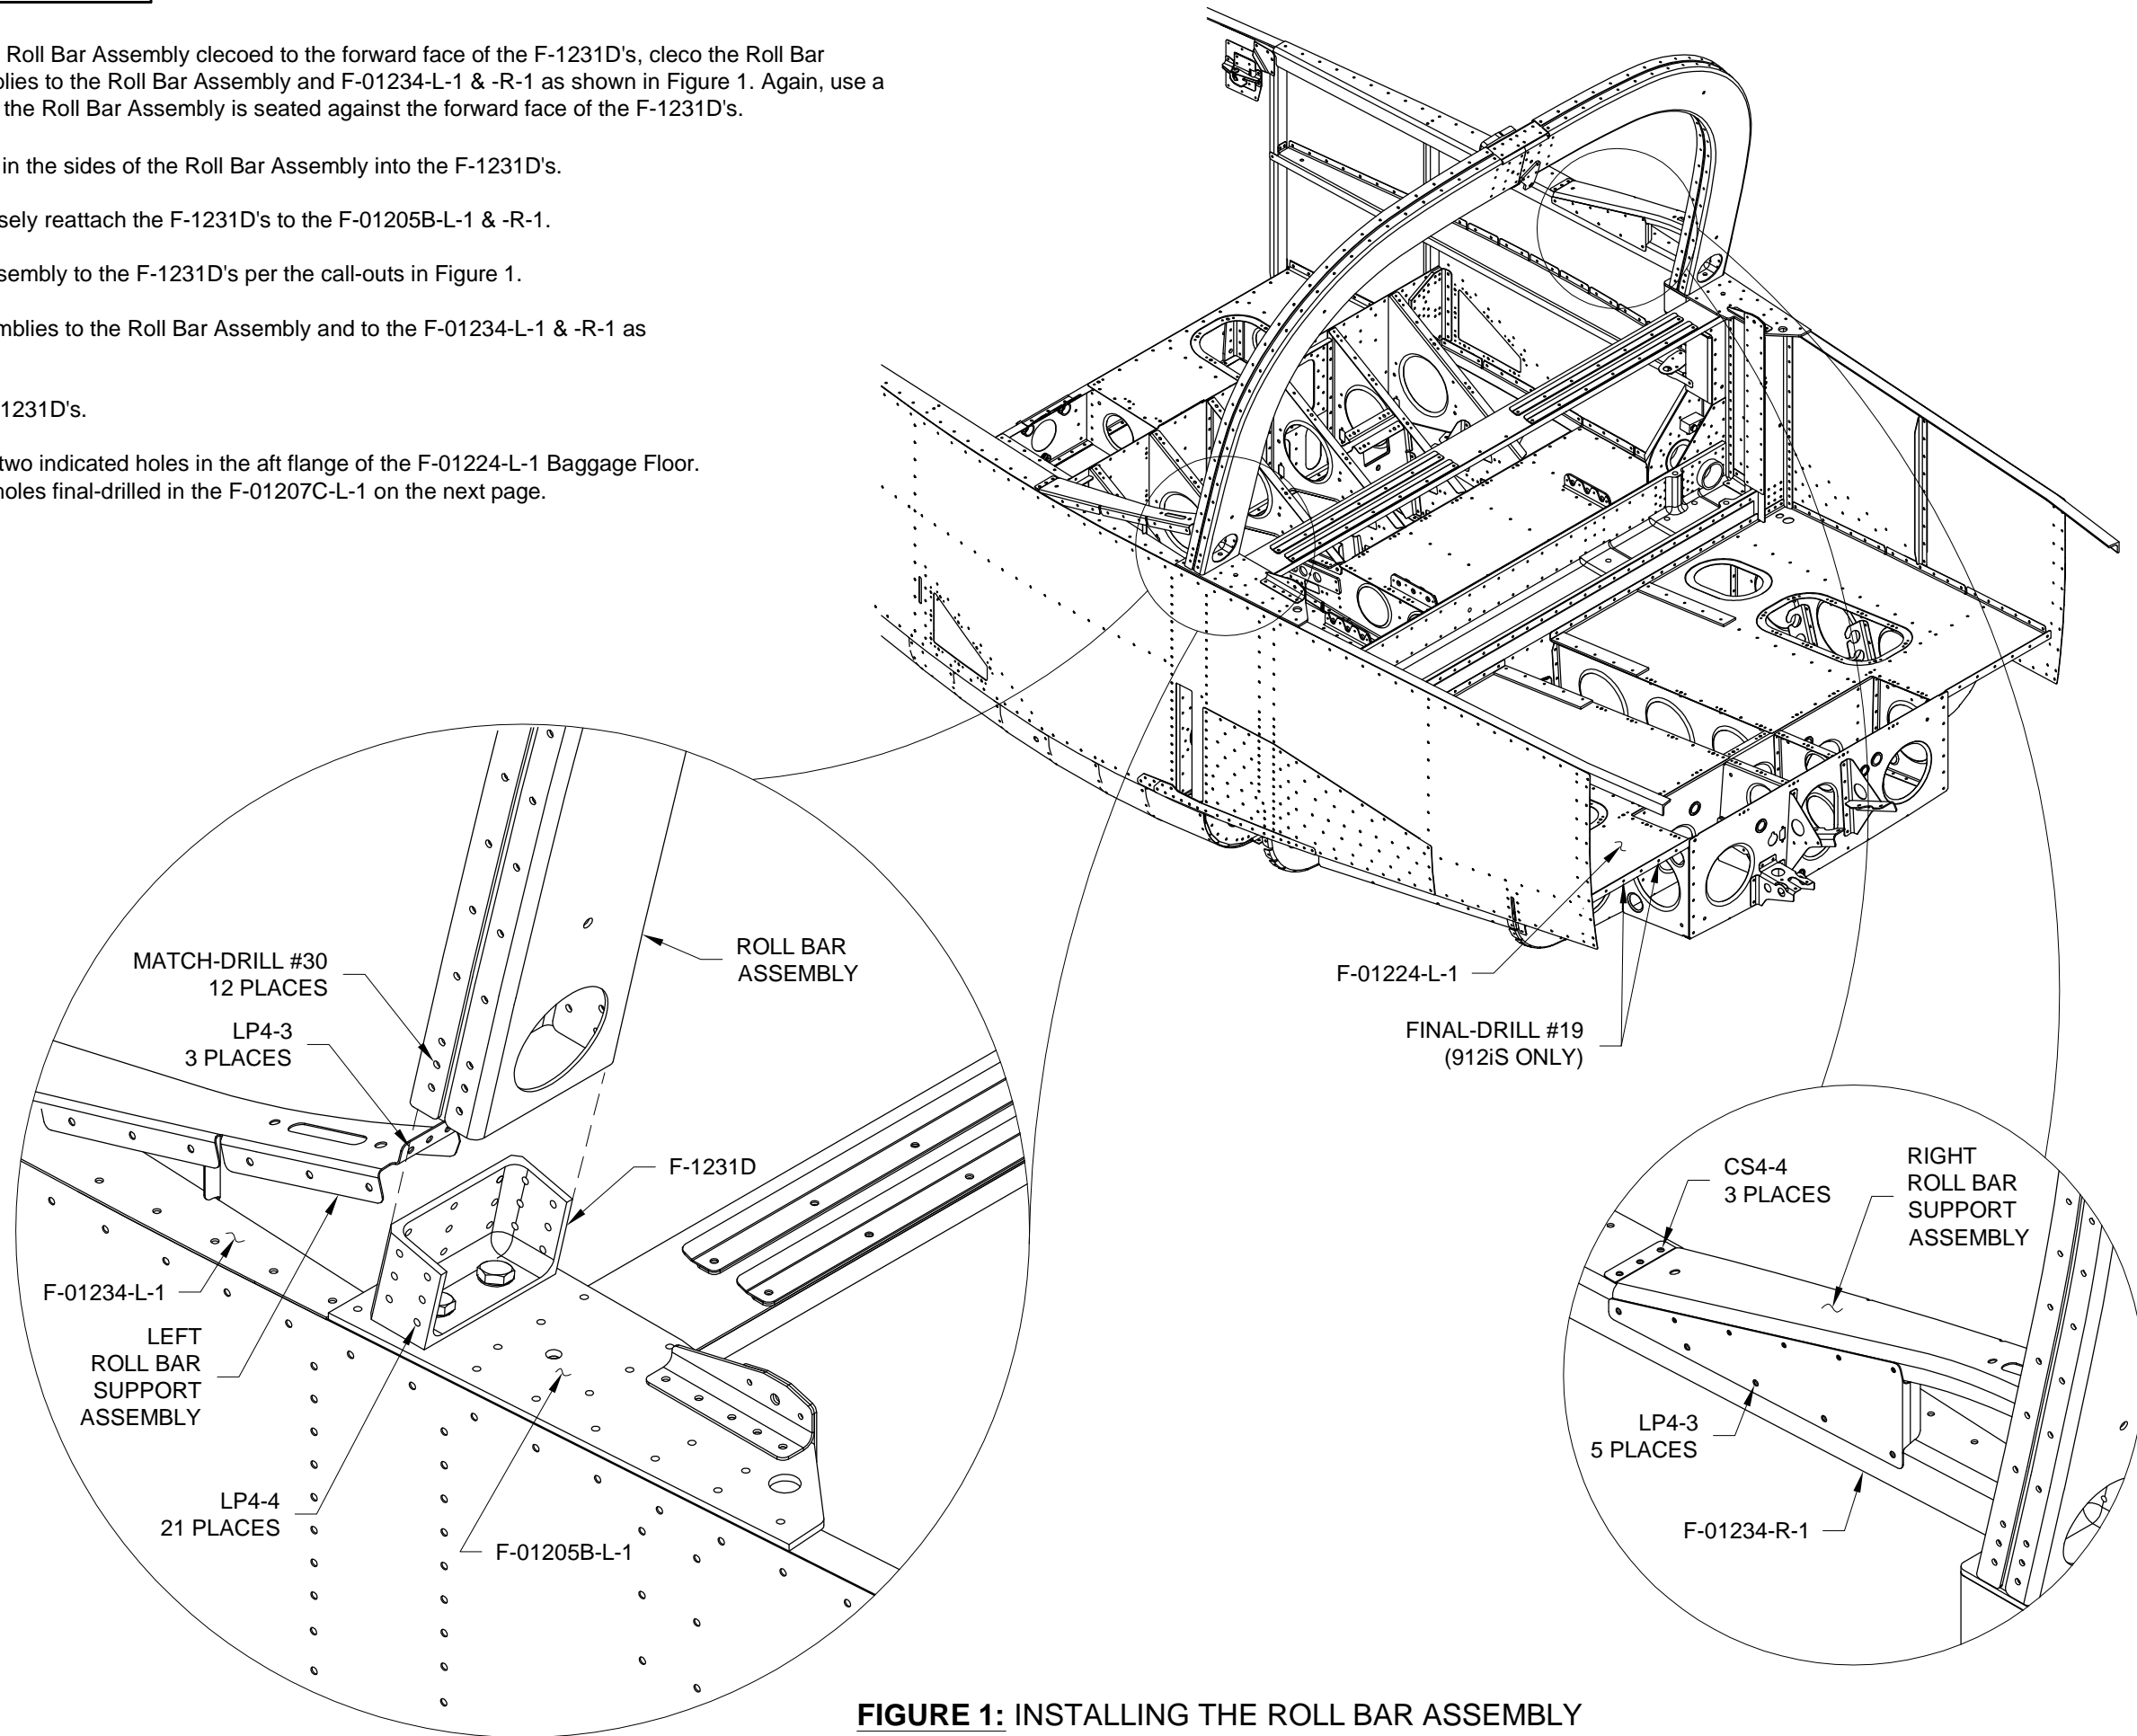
INSTALLING THE ROLL BAR ASSEMBLY
